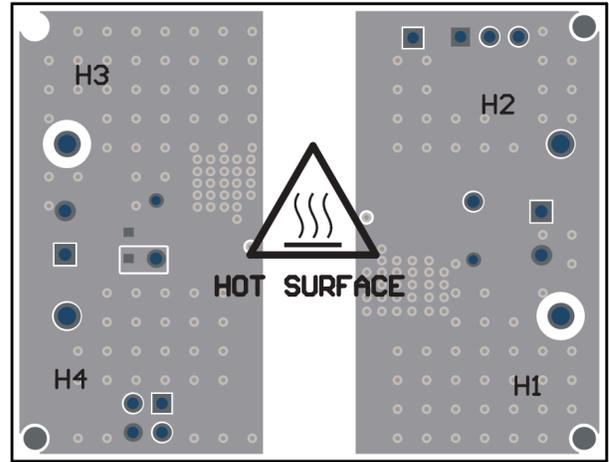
PCB Bottom Layer, Assembly (Mirrored View)
